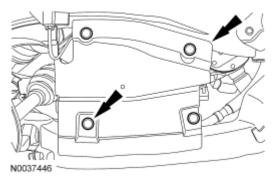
Locating LH Fender Splash Shield Screws Courtesy of FORD MOTOR CO.
